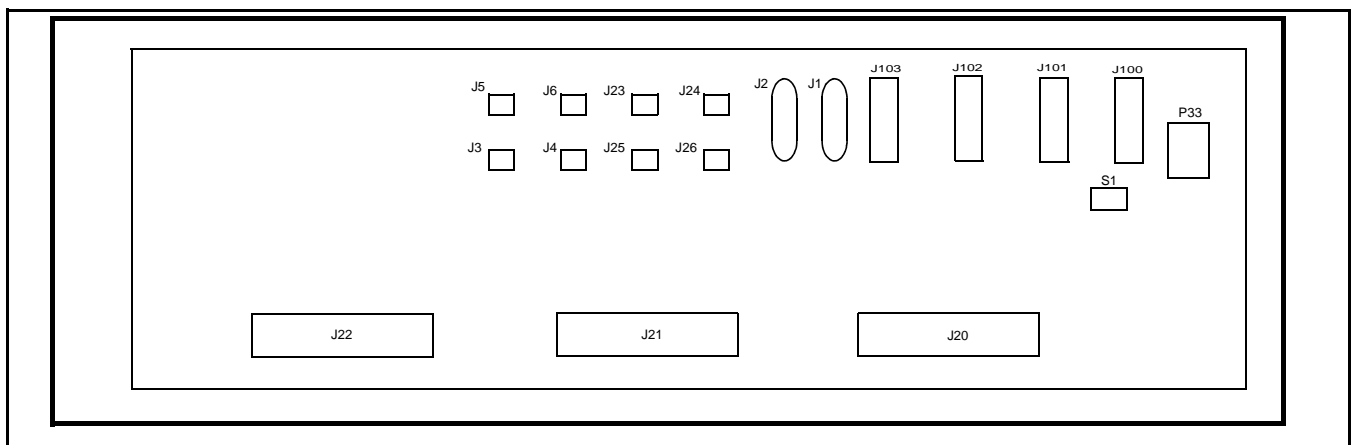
NetNIM SHELF BACKPLANE WIRING LAYOUT
